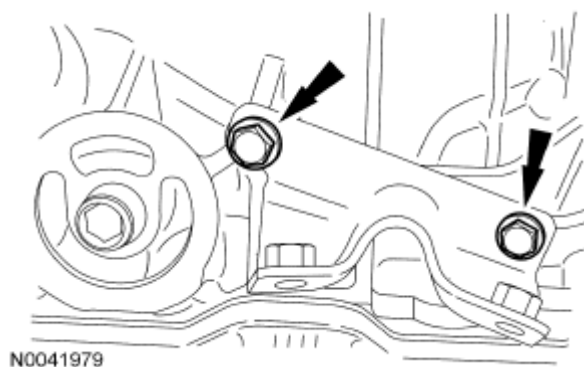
Locating LH Catalytic Converter Bracket Bolts
